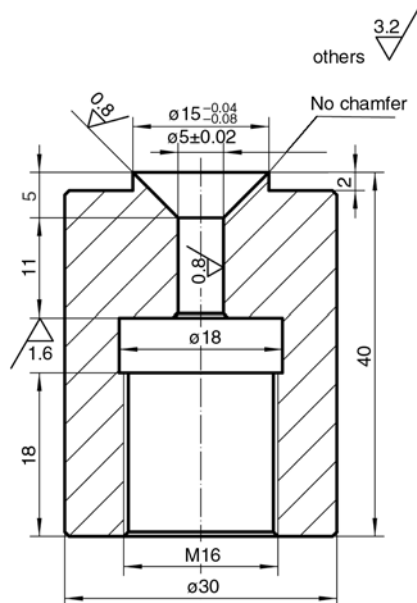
Typical design drawing of the extrusion die (L/D ratio: 10:5, mm/mm)
